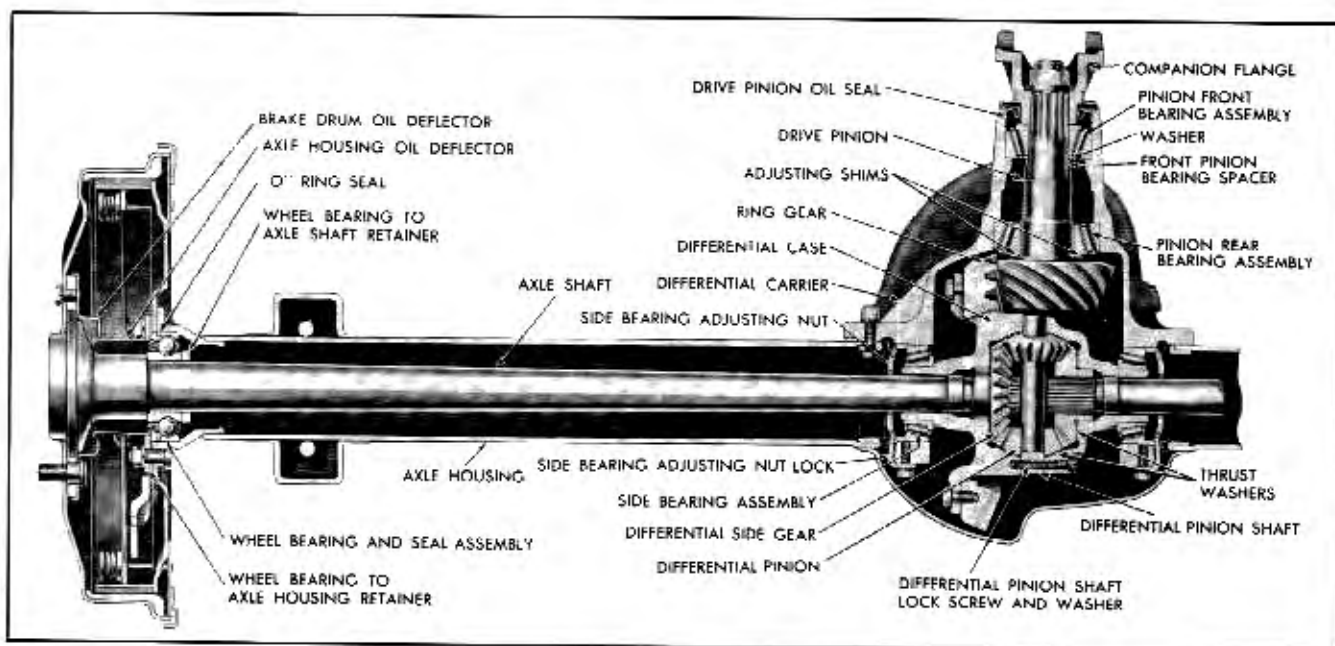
Differential Carrier and Axle Assembly—Cross Section
